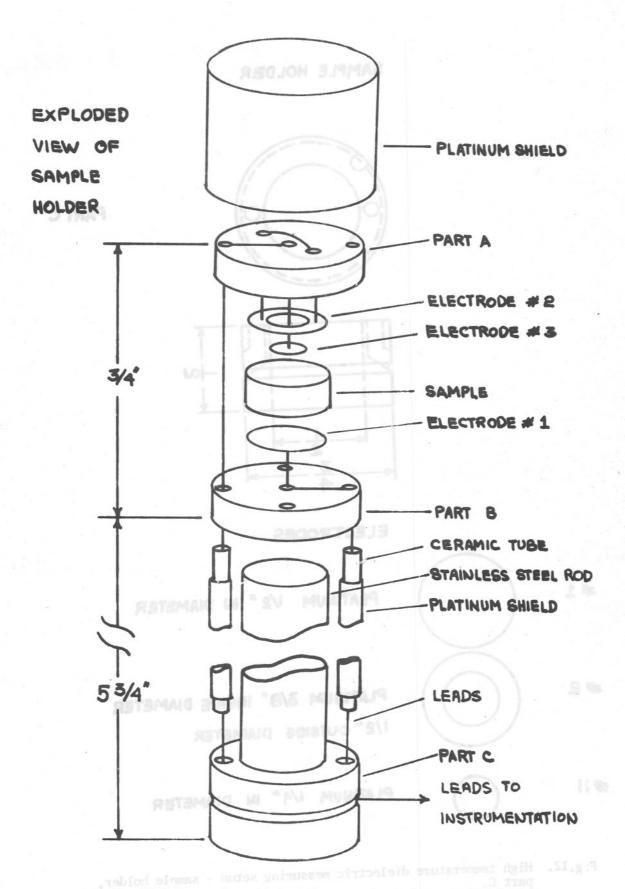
High temperature dielectric measuring setup - exploded view of sample holder.
